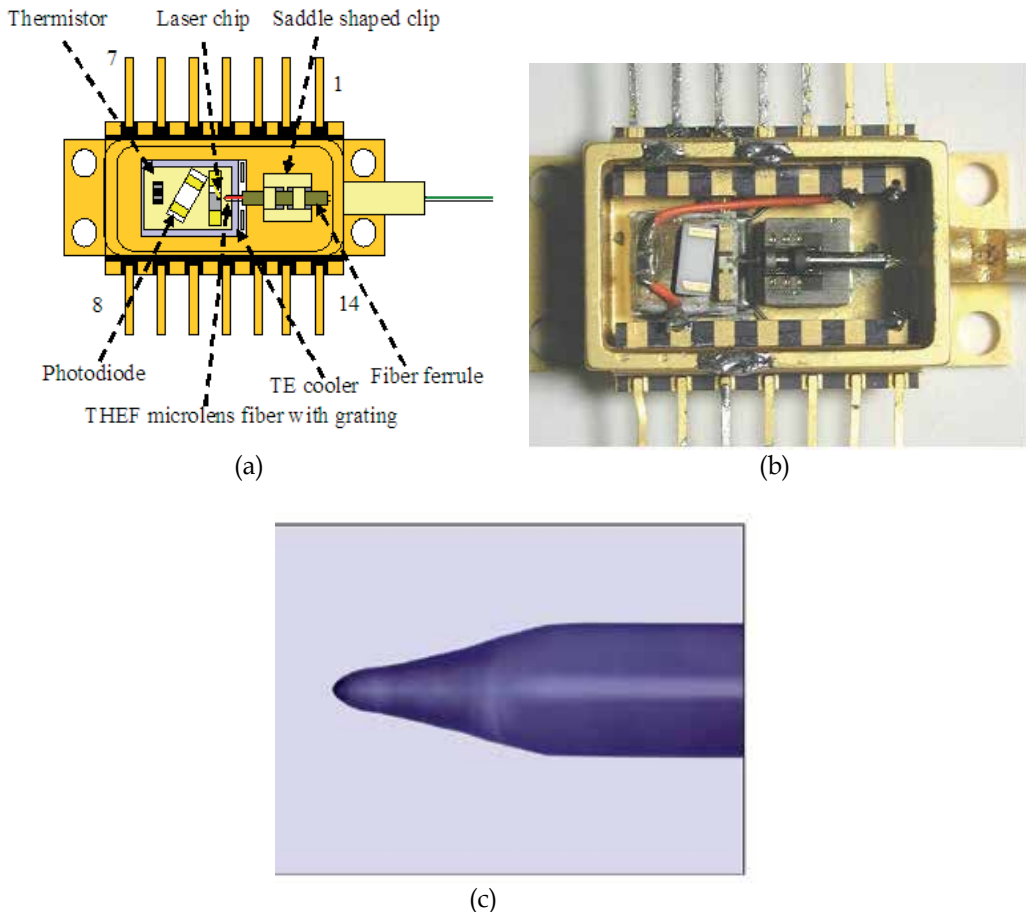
(a) AR-coated FGECL module, (b) laser-welded butterfly-type FGECL module, and (c) THEF microlens.
